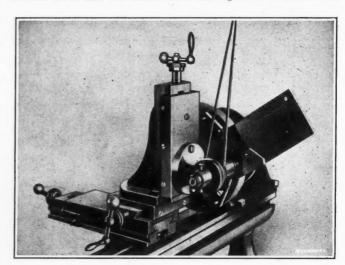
Milling Edges of Gage and Slots on Master Plate
